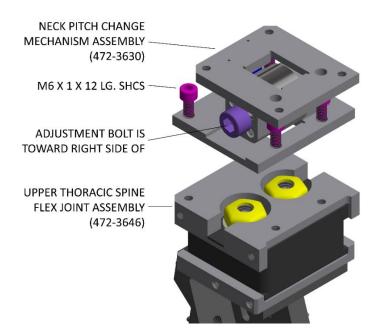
Neck Pitch Change Mechanism Assembled to Upper Flex Joint
